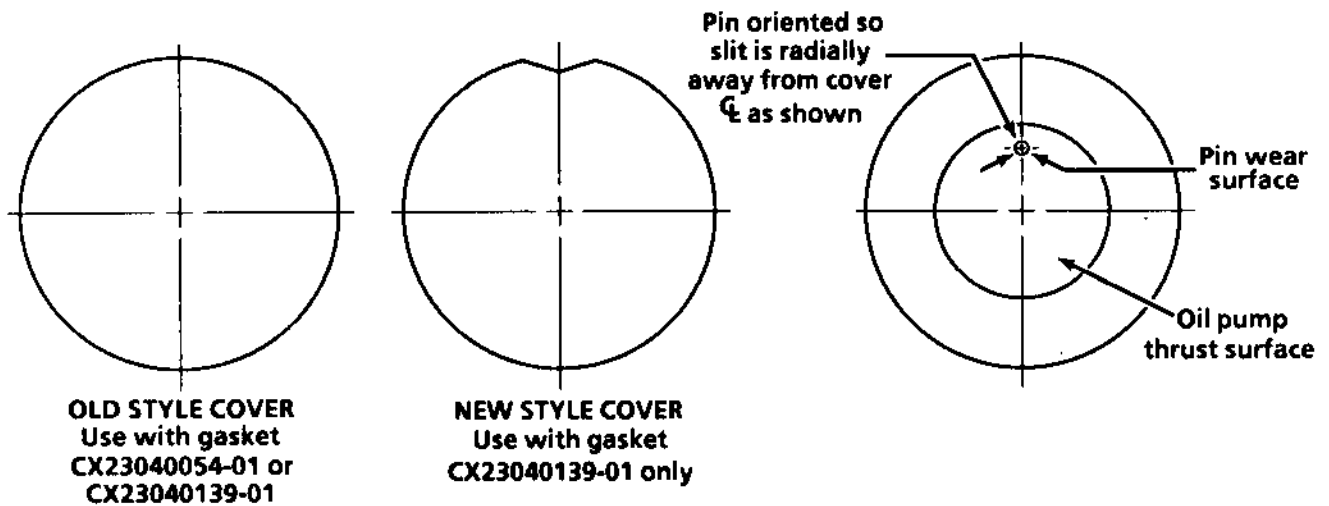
Checking Cover Plate and Roll Pin for Wear
